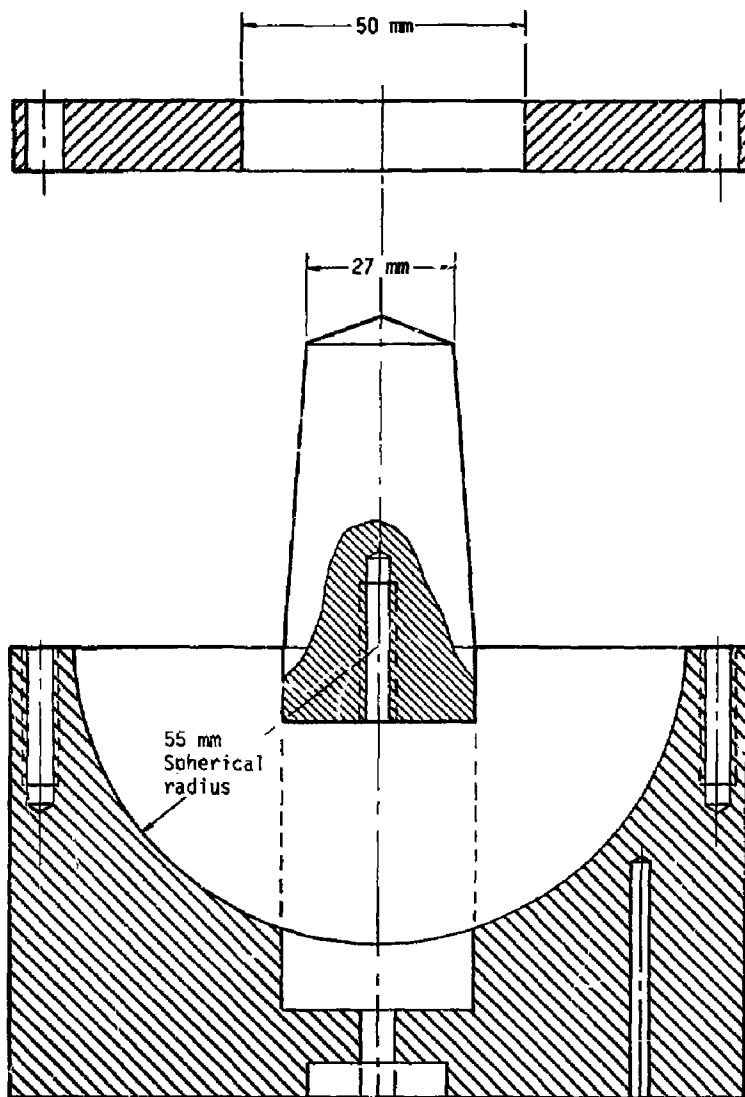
Mold for casting the Pu-1Ga hemispheres. (Taken from LLL drawings AAA 76-115142-00, 76-115140-00, and 76-115141-00).
